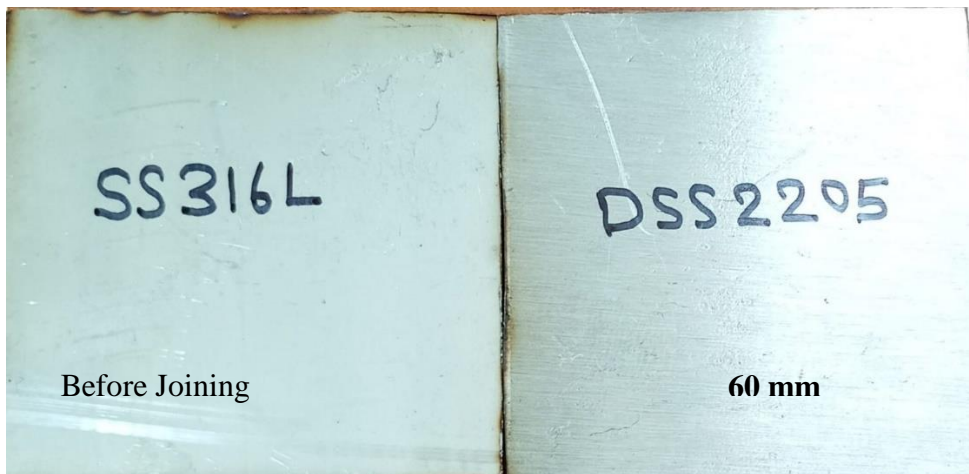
Sample of DSS 2205 & SS 316L plate before welding
